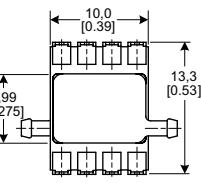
DIP Package Dimensional Drawings (For reference only: mm [in])
